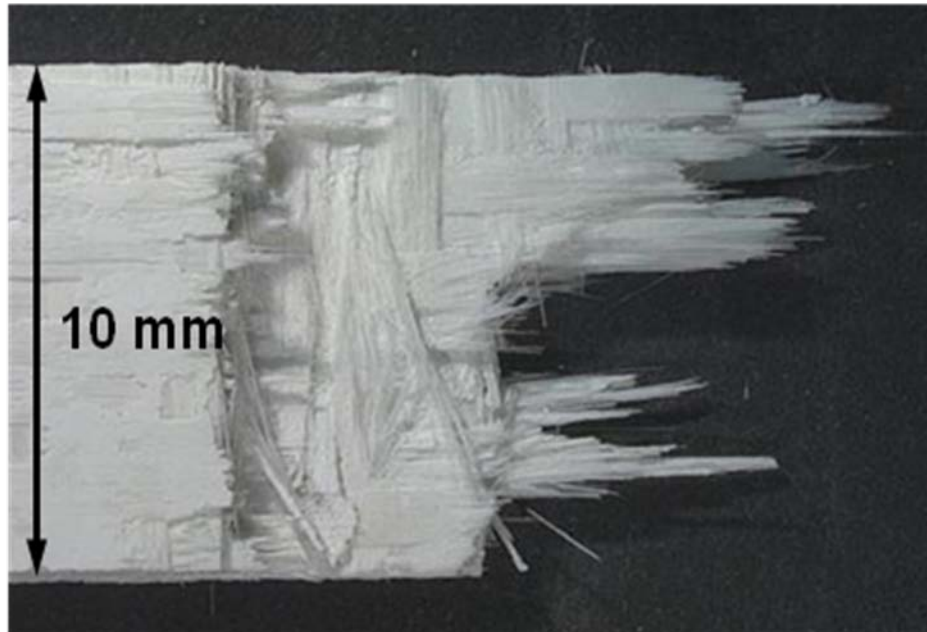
Fracture surface of the N720/AM specimen tested in creep at 109 MPa in laboratory air at 1100°C.
